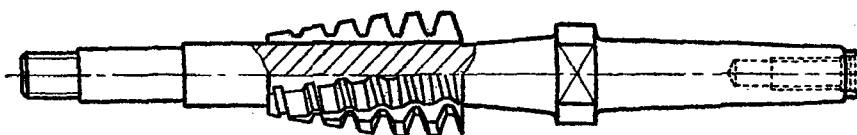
GEAR HOB WITH CROSS SLOT DRIVE
